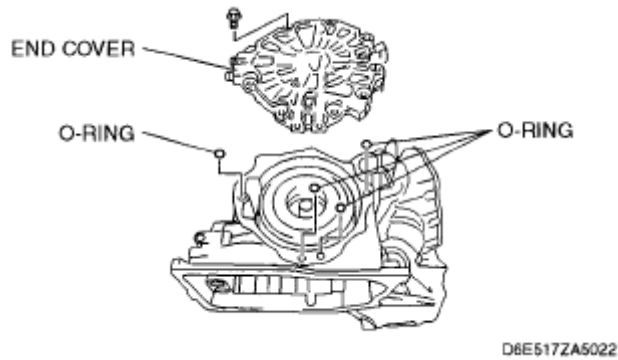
View Of End Cover, O-rings And Transaxle Case
